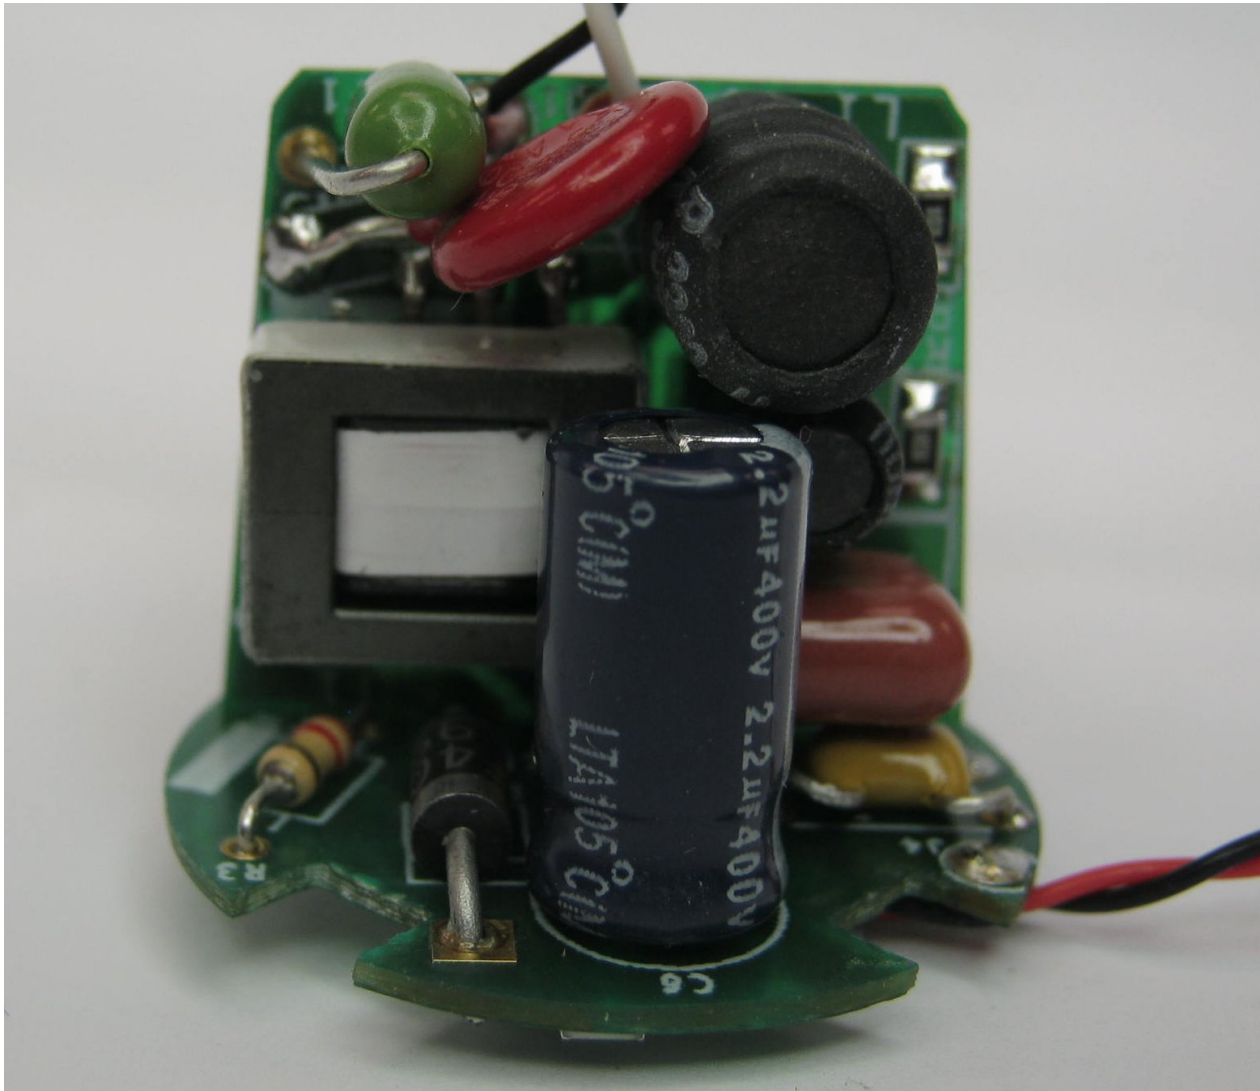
PCB Assembly, Board 1 and Board 2 Combined.
